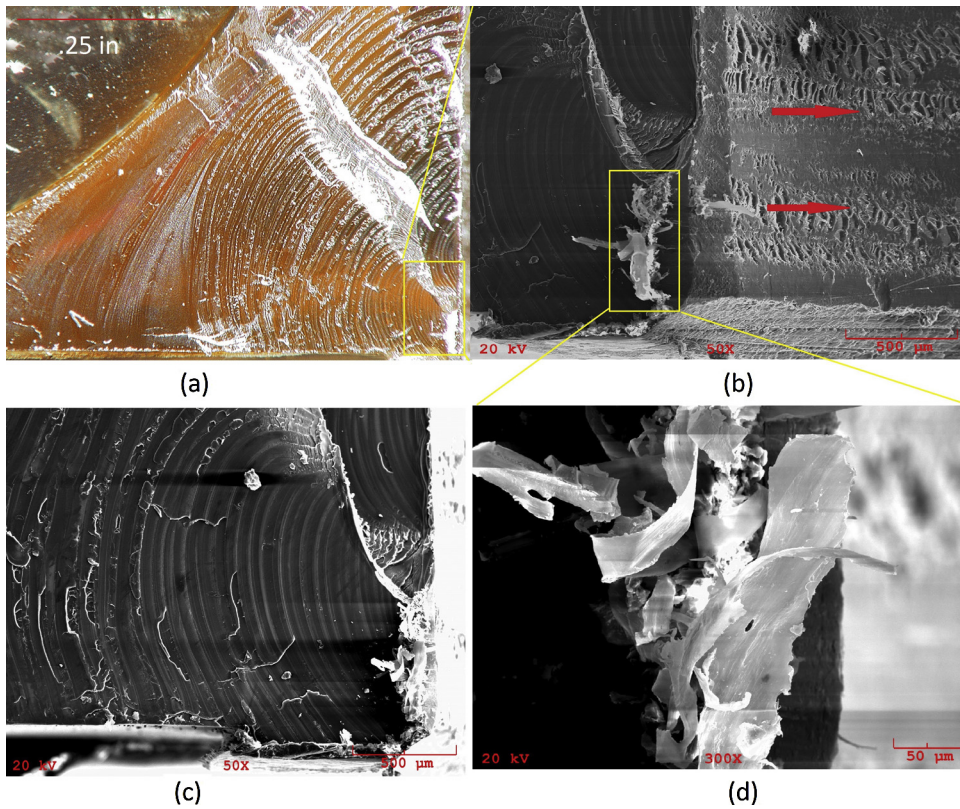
(a) High magnification light microscopy image of left side fracture face reveals Wallner lines emanating from bottom corner. (b) Scanning electron microscopy image of corner shows fibril development, and defects along inner diameter bore of impeller. (c) Scanning electron microscopy image reveals transition from smooth to rough Wallner lines signifying accelerating crack front. (d) High magnification SEM image of fibril development.
